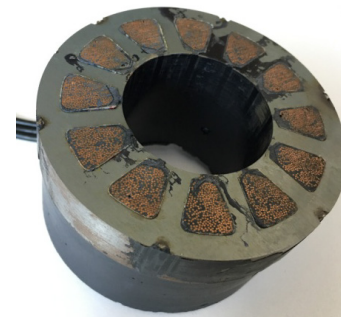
Cut-away view of high-speed motor stator with impregnation, developed by ZJU.
